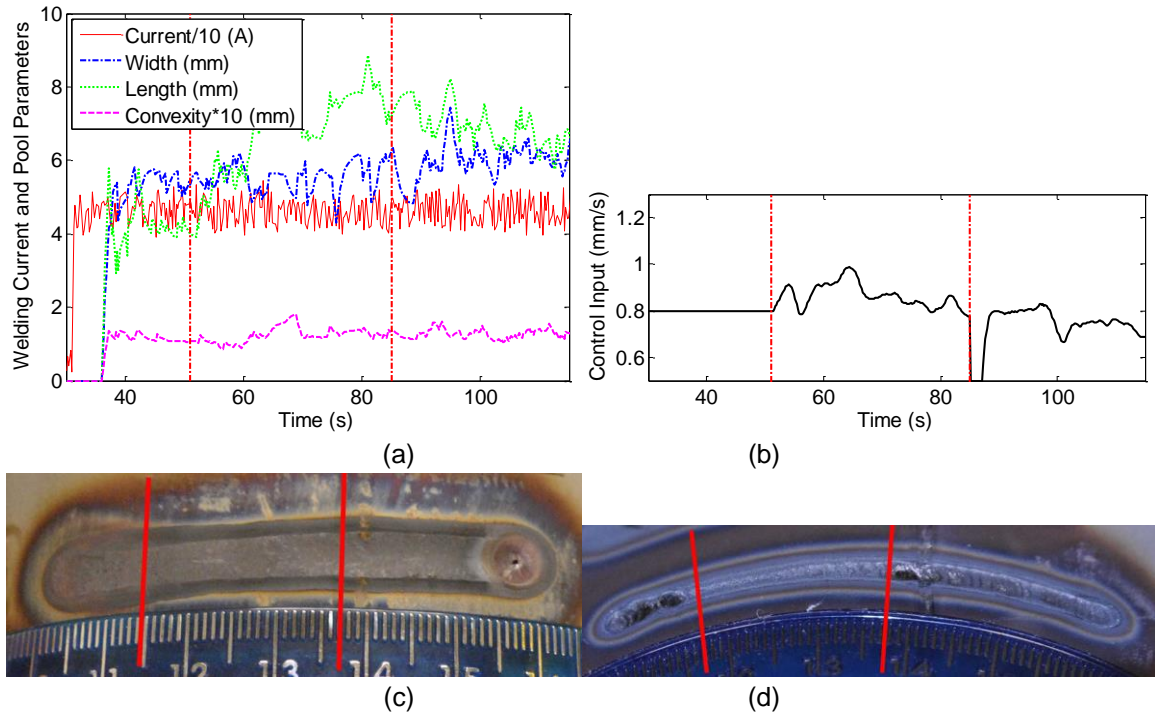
Experiment 2 results (a) Welding current and weld pool parameters (b) Control input (c) Front-side bead (d) Back-side bead.
